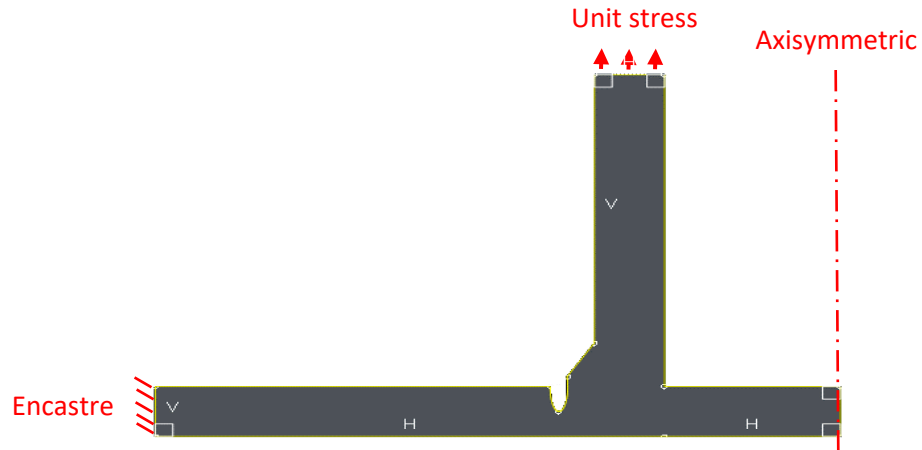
Idealised model for a tubular member welded to a base plate.
